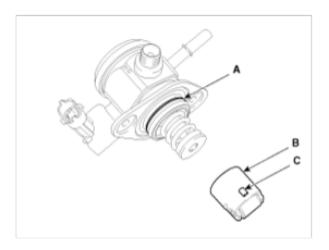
Identifying High Pressure Fuel Pump And Roller Tappet Courtesy of HYUNDAI MOTOR AMERICA
